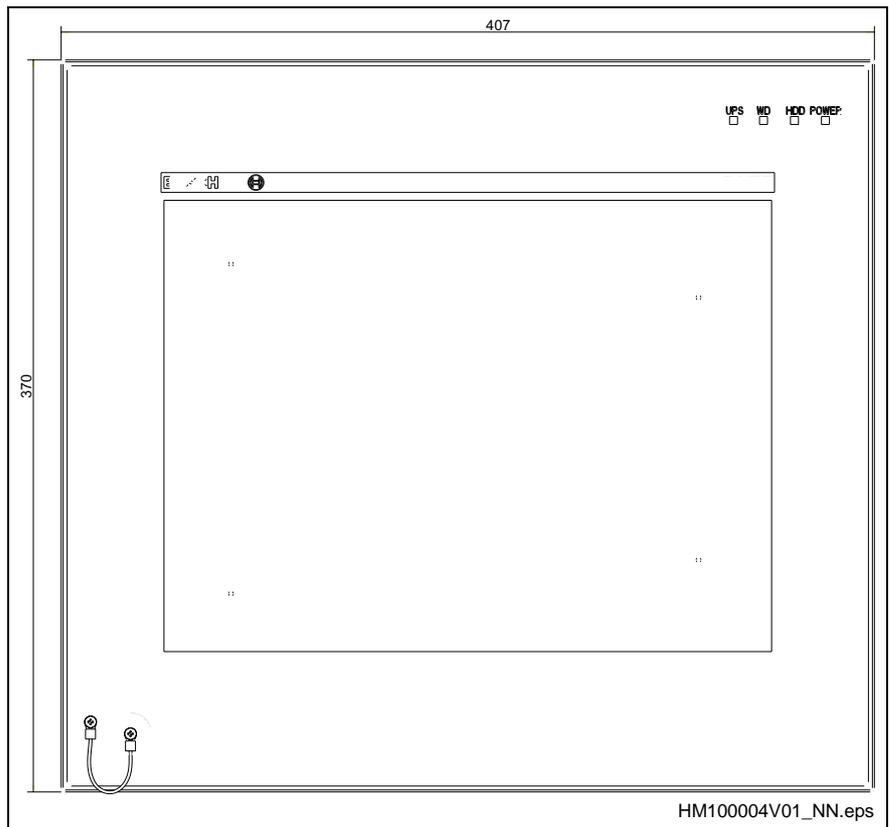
Dimensions – front panel BTV 40.2BE
